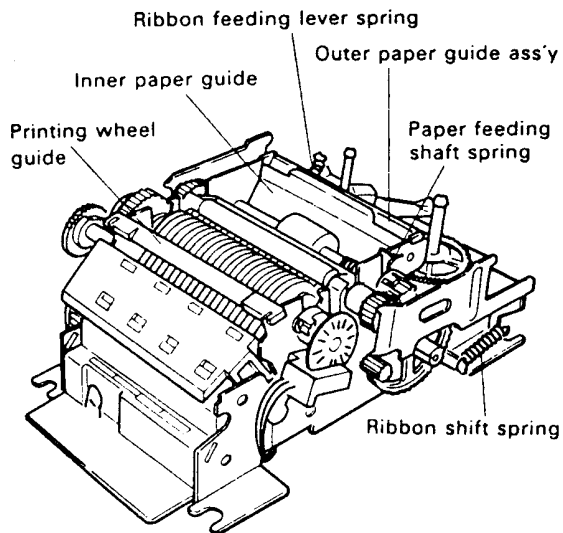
Parts Not to Grip When Carrying the Printer
